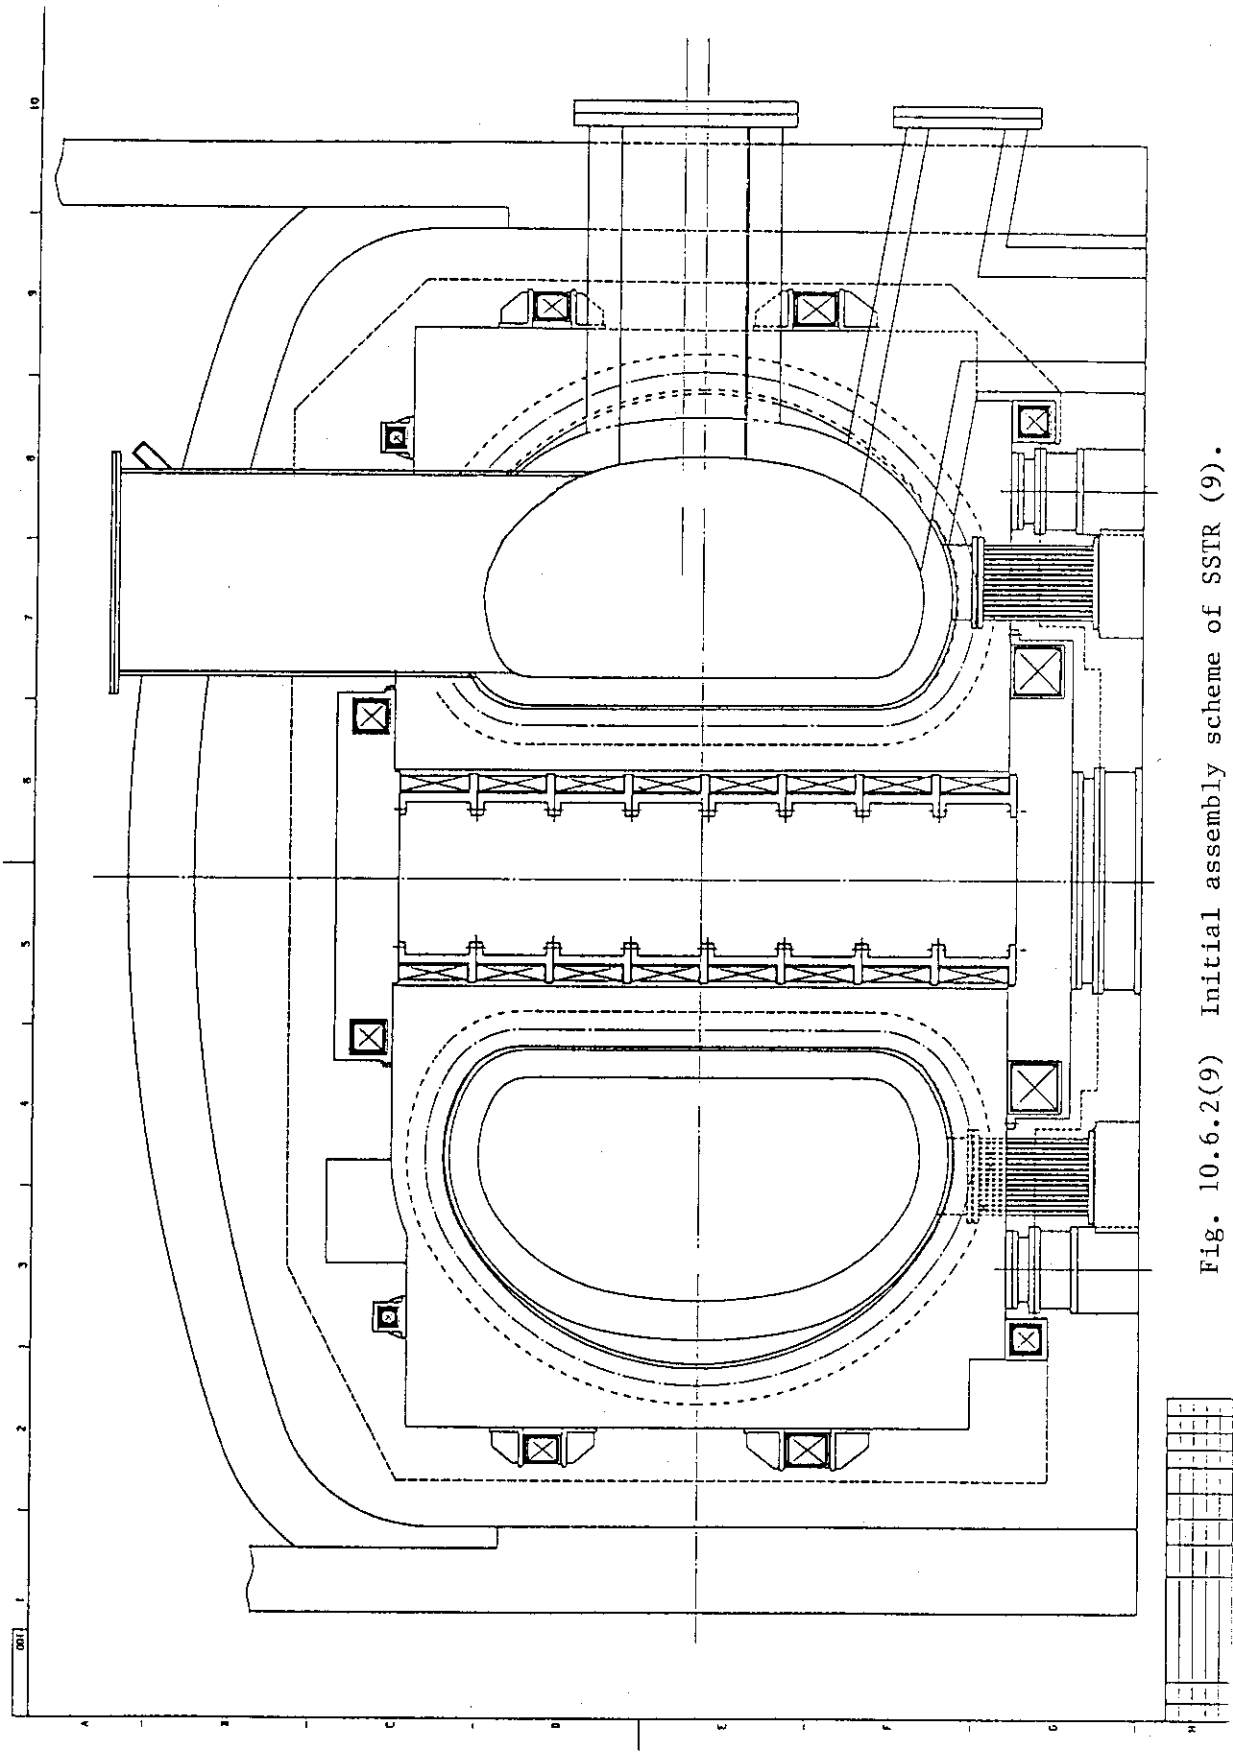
(9) Initial assembly scheme of SSTR (9).
